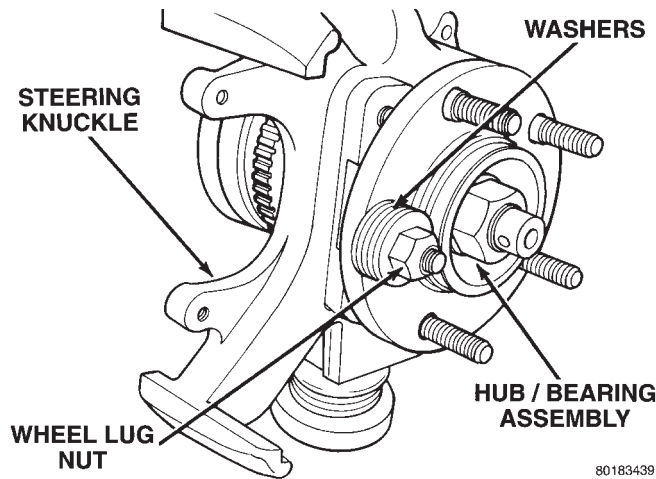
Installing Wheel Stud Into Hub And Bearing
